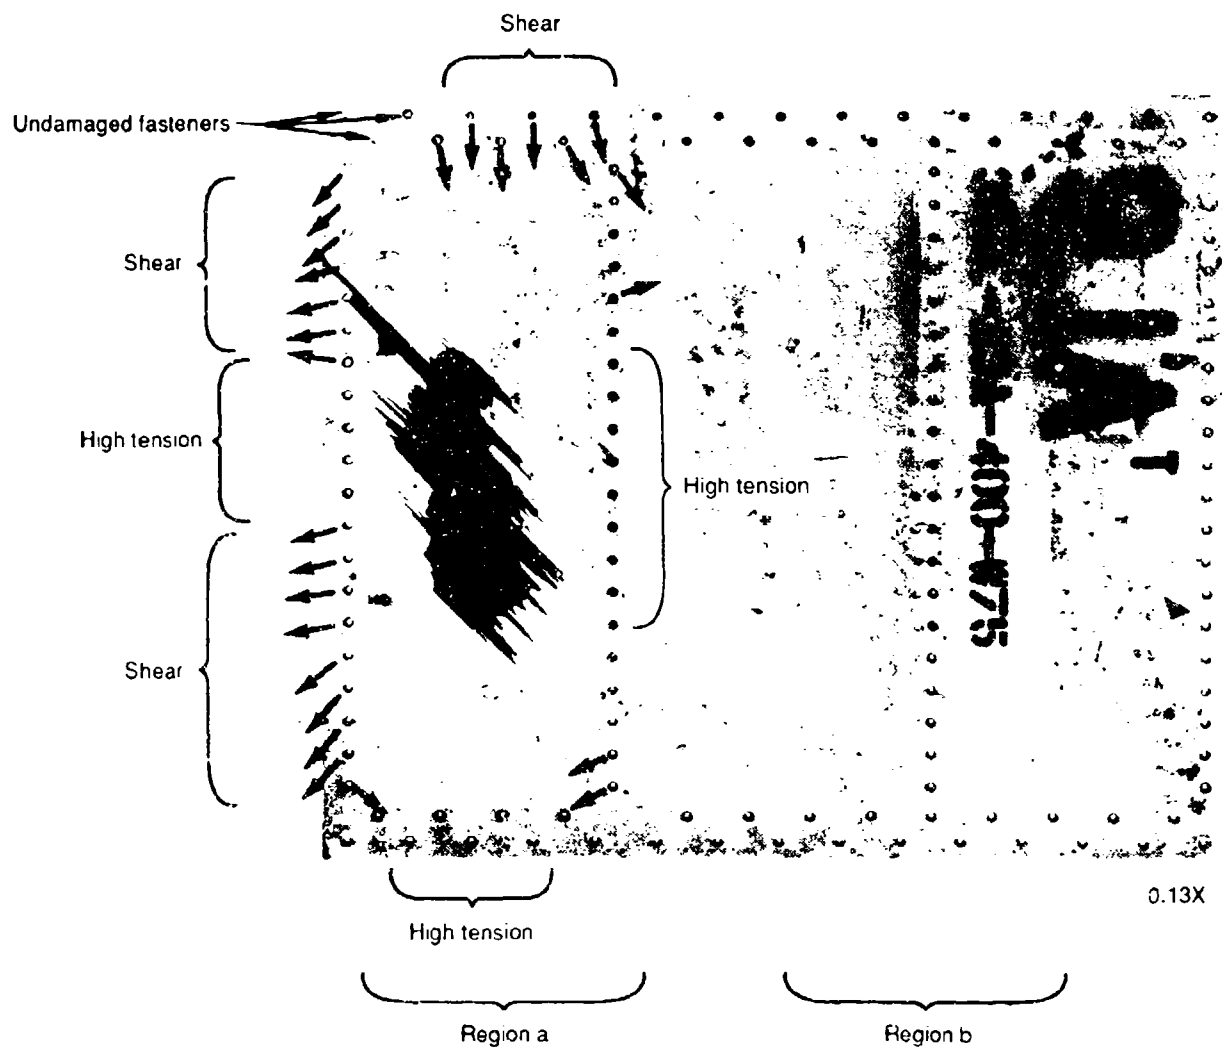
Mapping of the Fastener Hole Damage
